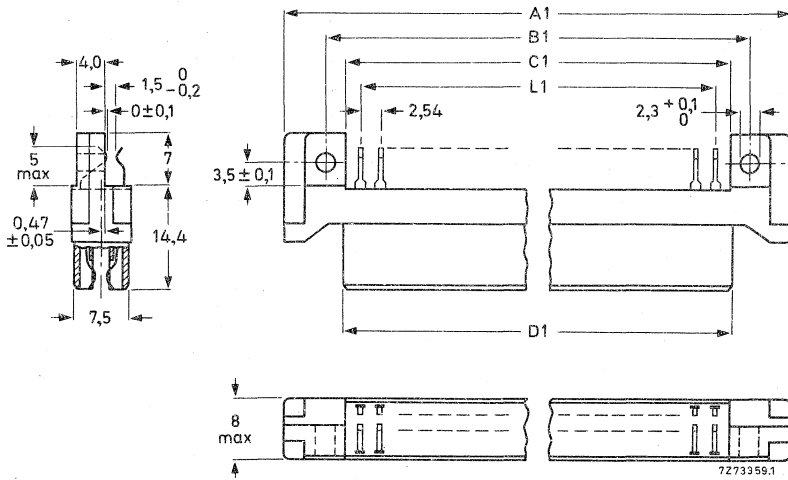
Female part with solder tags; see Table 2 for dimensions A1, B1, C1, D1 and L1.
